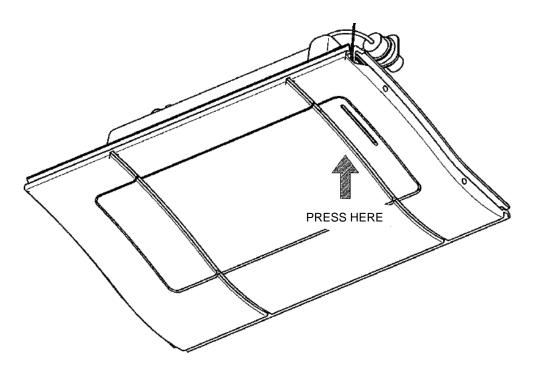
Closing the Door on the right Hand Passenger Emergency Exit Mask Assembly
